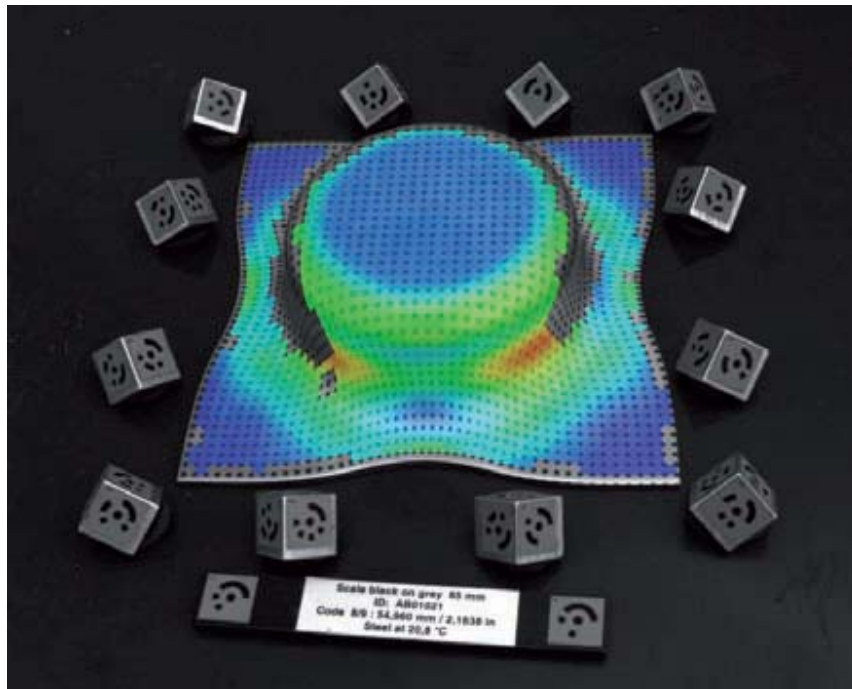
Photogrammetry based Sheet Metal Forming Analysis
